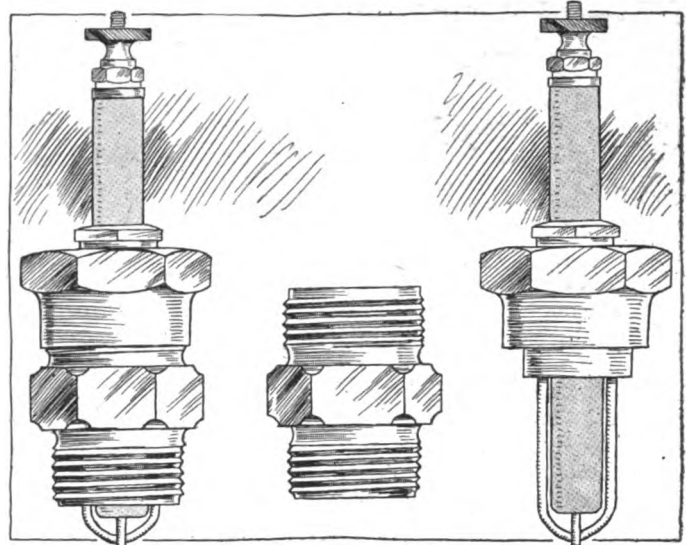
Assembly of the Hartford heavy-duty spark plug
